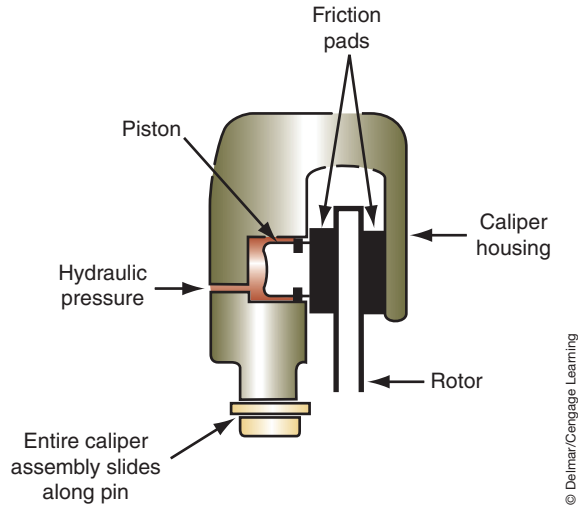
Hydraulic pressure in the caliper forces the disc brake pads against the spinning motor.
